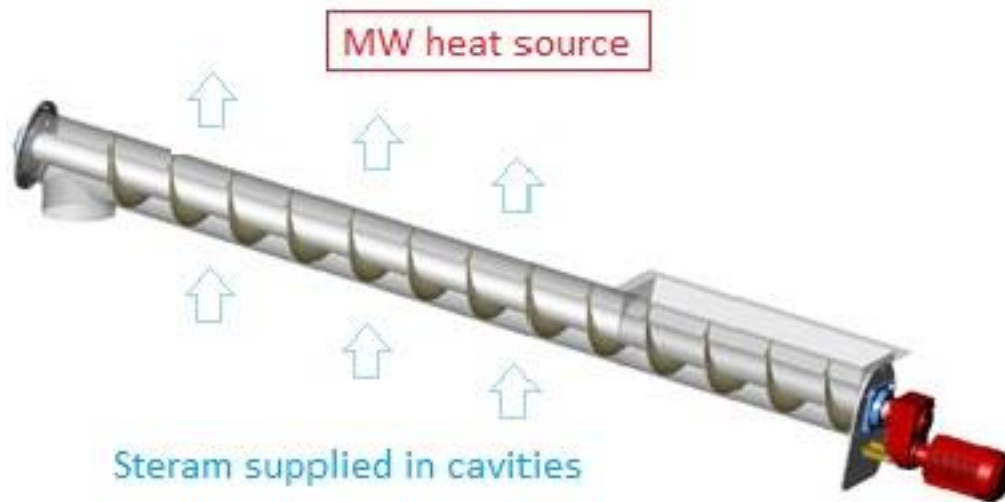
Steam supplied in cavities under the screw conveyor. The screw conveyor is fitted inside the thermal separation chamber
